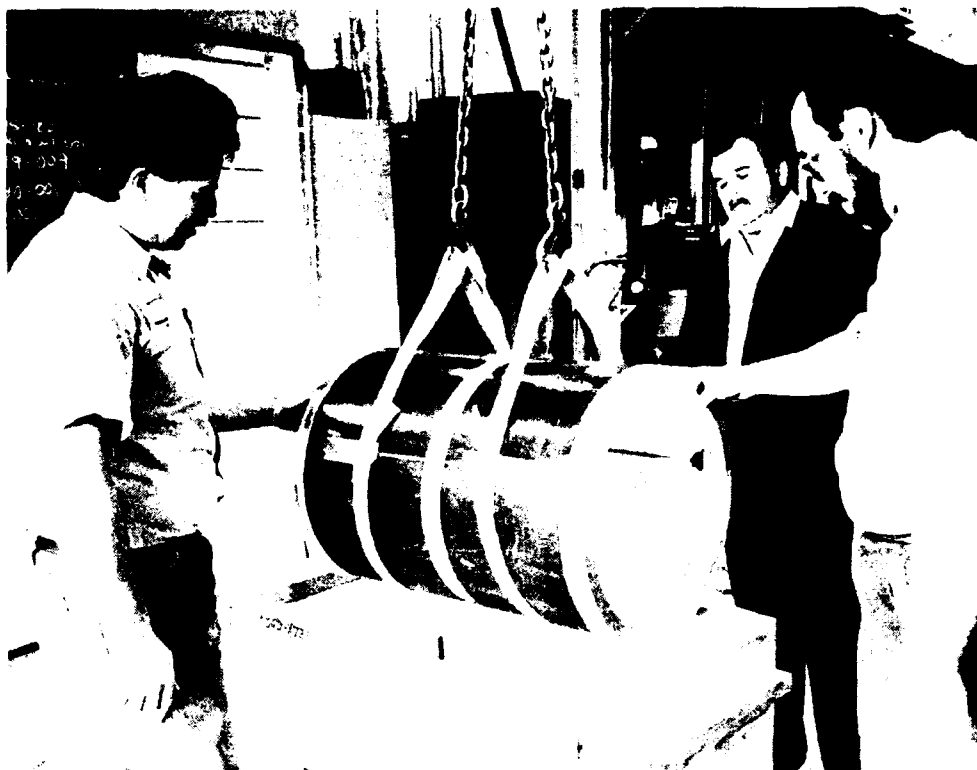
Typical handling arrangement for 20-inch OD test cylinders.
